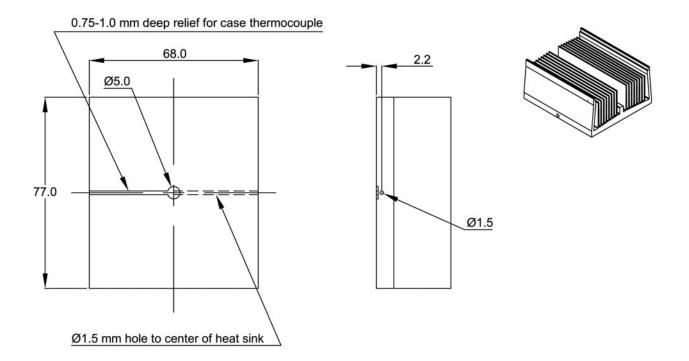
Heatsink Thermocouple Relief Groove and Measurement Hole
